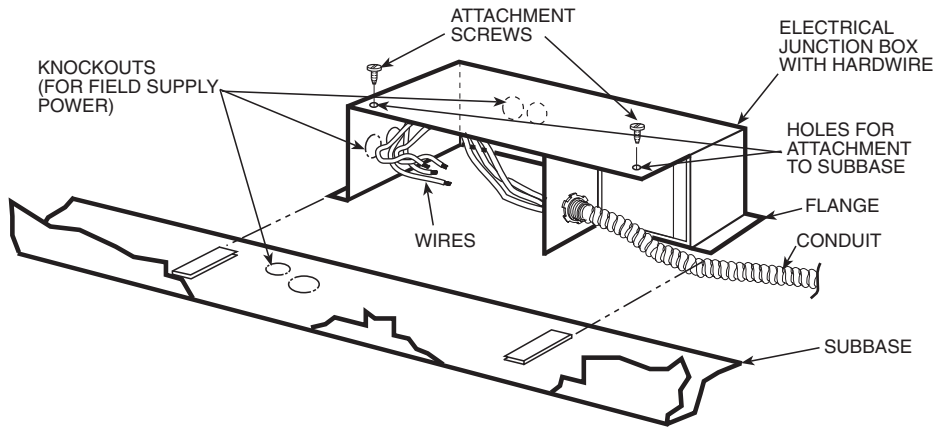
Exploded View of Electrical Junction Box to Subbase
